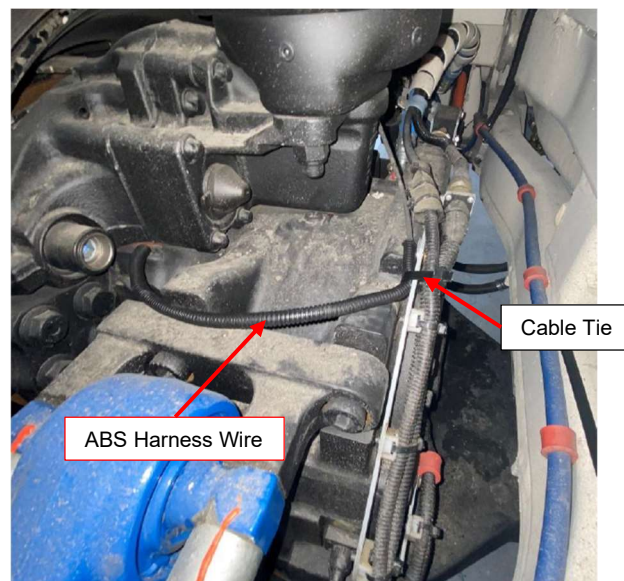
Re-routed ABS Harness Wire with Convolute Tube Installed
